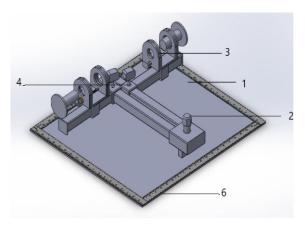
Jig and Fixture for Welding of Suspension Arms
